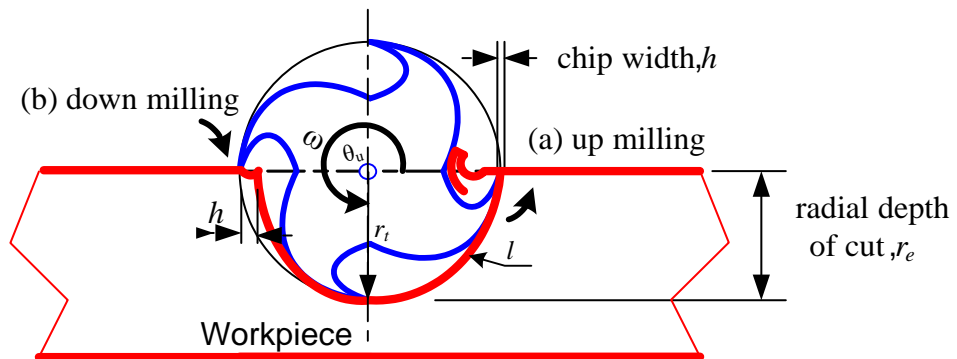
Tool and Workpiece Geometry during up and down milling
